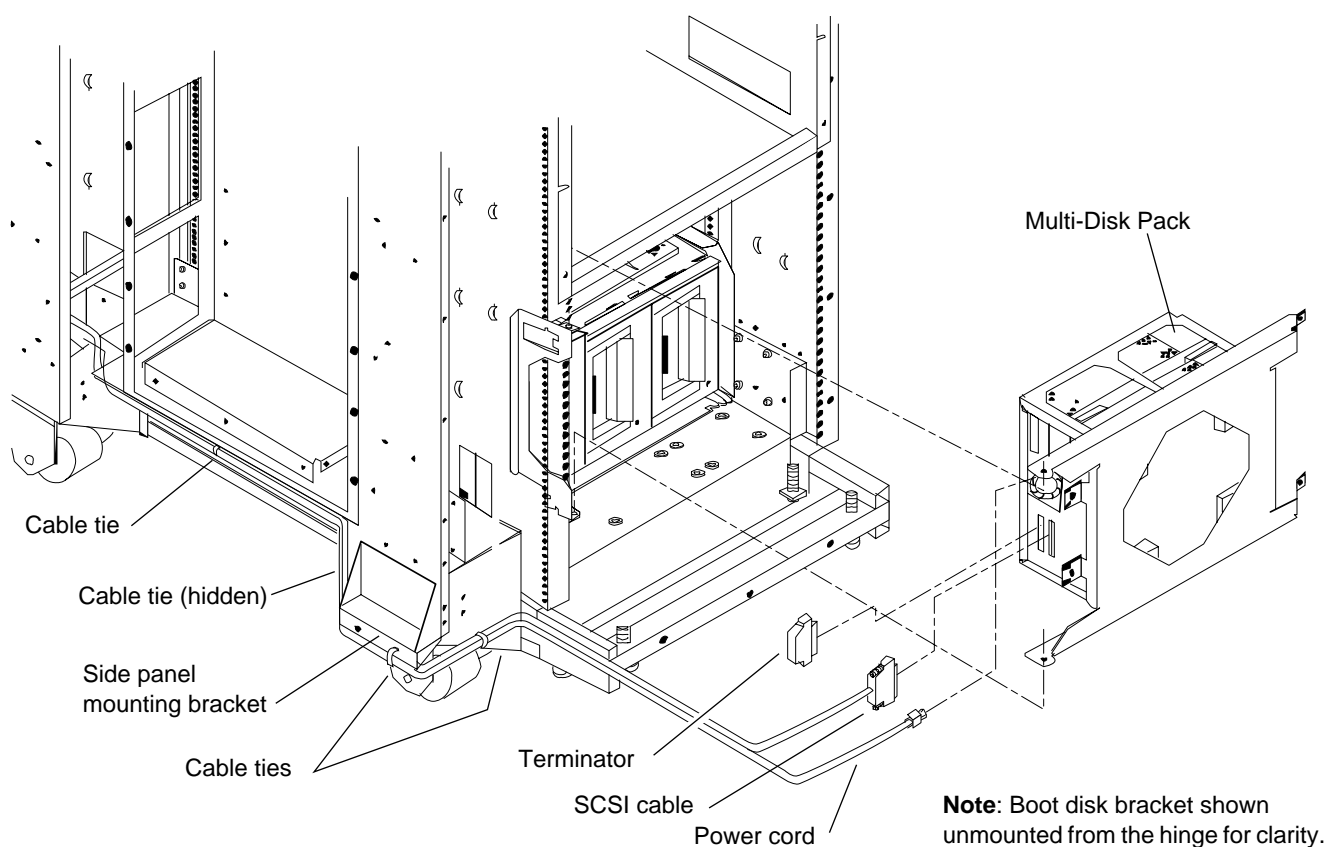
Boot Disk Cabling — Multi-Disk Pack
